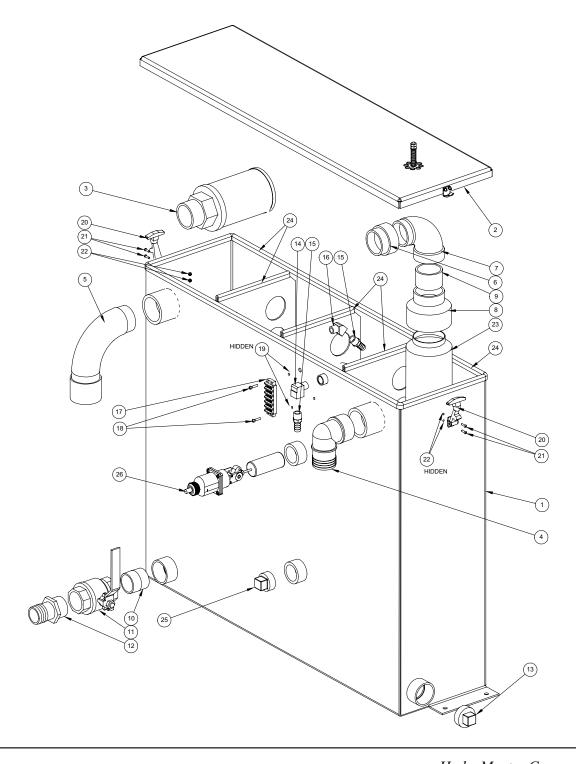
Lower Heat Exchanger Assembly D-2665 Rev B
